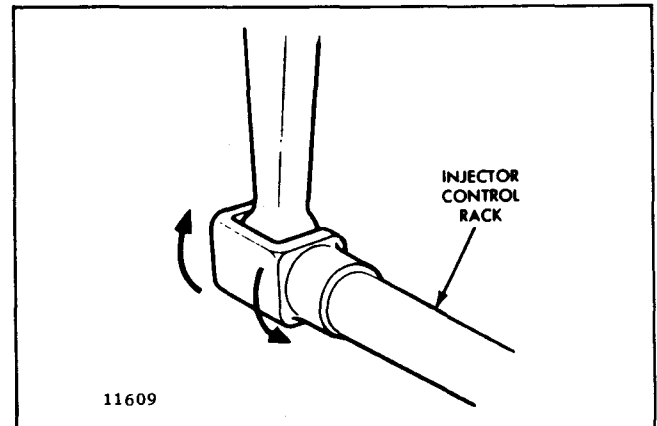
Checking Rotating Movement of Injector Control Rack
